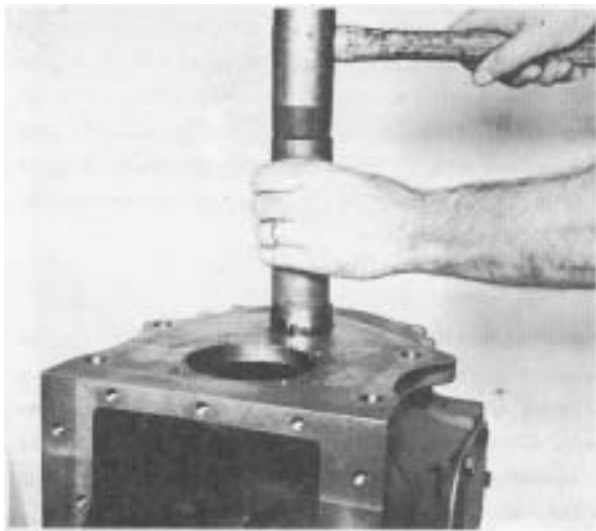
If countershaft front bearing is to be replaced, remove clutch housing and drive front bearing from transmission case. Apply a light coat of permatex No. 2 on the outer diameter of the new bearing. Install in transmission case as shown with end of bearing .001 to .007 below the face of case. Install main drive gear and bearing assembly in transmission case. Install main drive gear bearing cap on drive gear.
